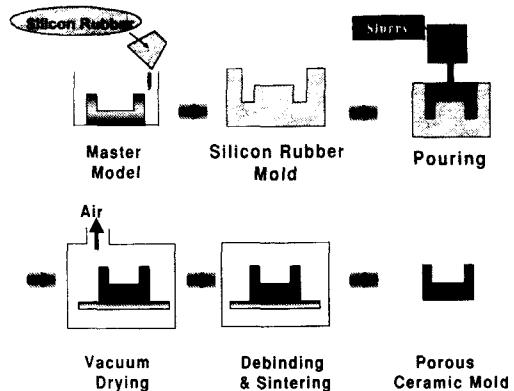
The Manufacturing Process of Slurry Casting⁴⁾
